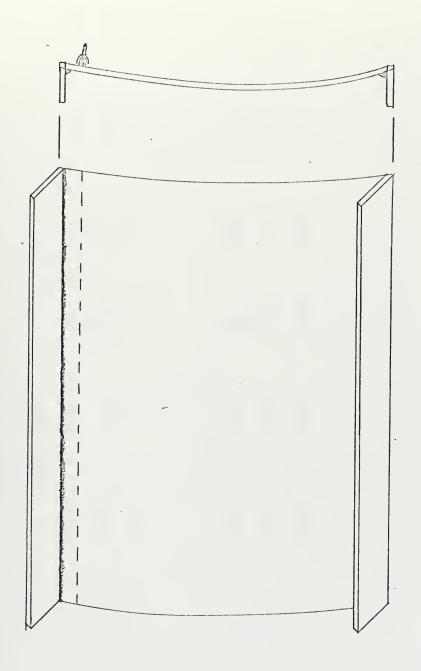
Illustration of how flame heating should be applied to remove distortion from welding
